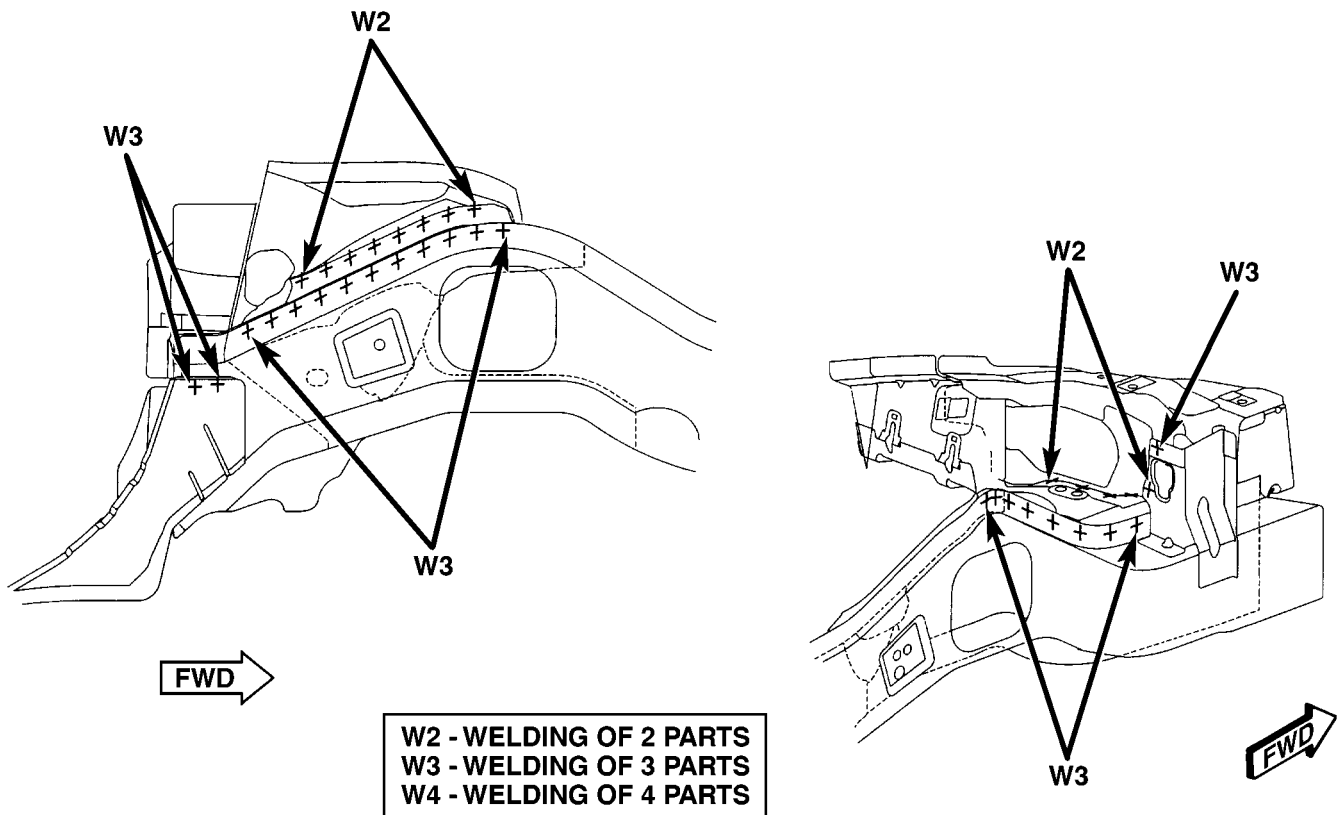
FRONT WHEELHOUSE TO FRONT SIDE RAIL AND HEADLAMP
